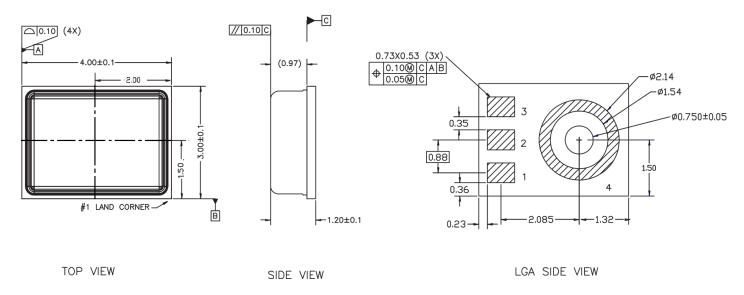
4-Terminal Chip Array Small Outline No Lead Cavity 4 mm \times 3 mm \times 1.2 mm Dimensions shown in millimeters
